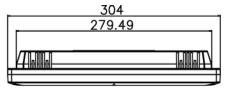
AFL-10A-N26 Dimensions (mm)
